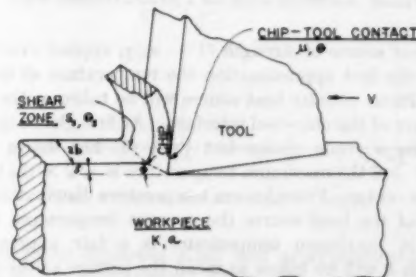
MODEL OF ORTHOGONAL METAL MACHINING WITH TYPE 2 CHIP
